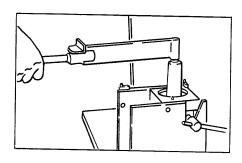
Tightening Injector Nut With Torque Wrench and Tool J 4983-01
